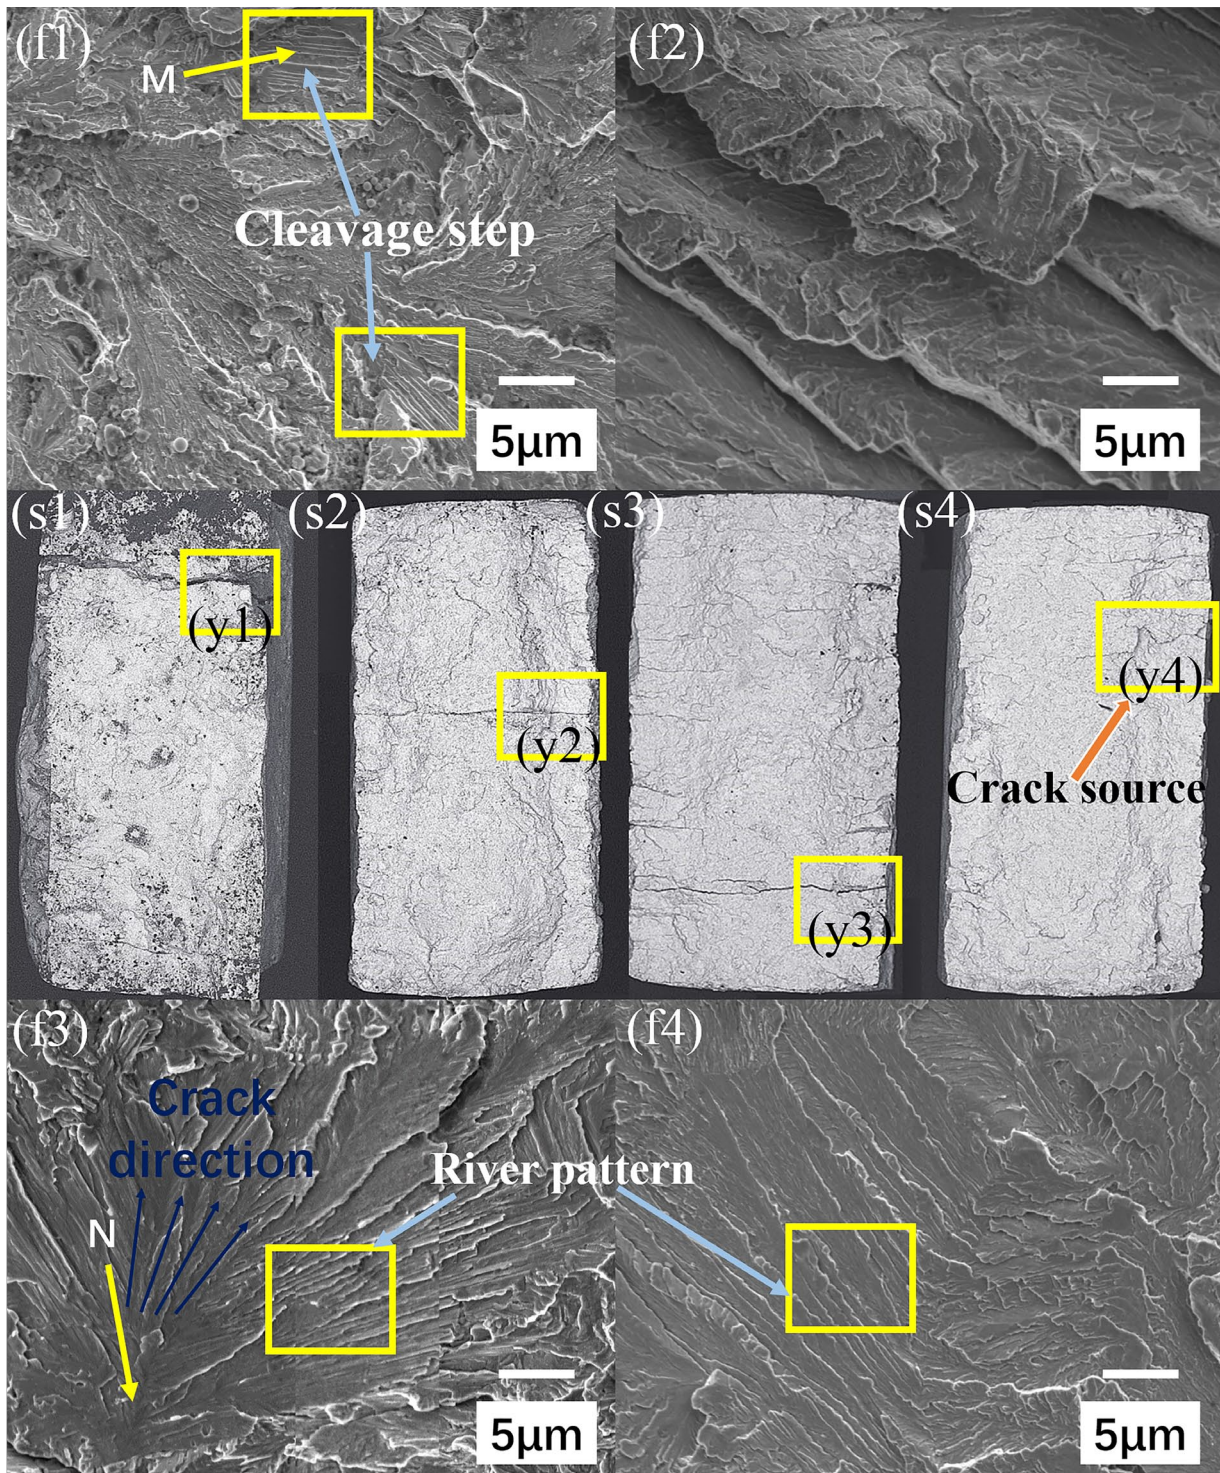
s1, s2, s3, s4 and f1, f2, f3, f4 respectively was macro and micro fracture morphology of welding joints under condition of 2100 W, 2300 W, 2500 W, 2700 W
